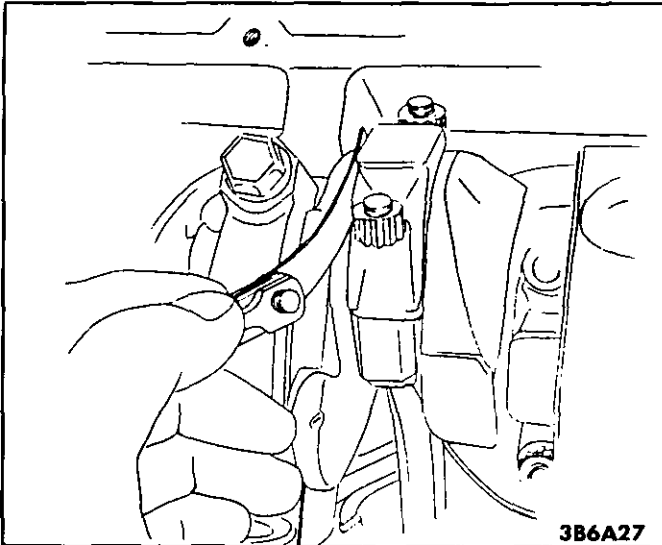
Measuring Connecting Rod Side Clearance (Single Rod Journal)
